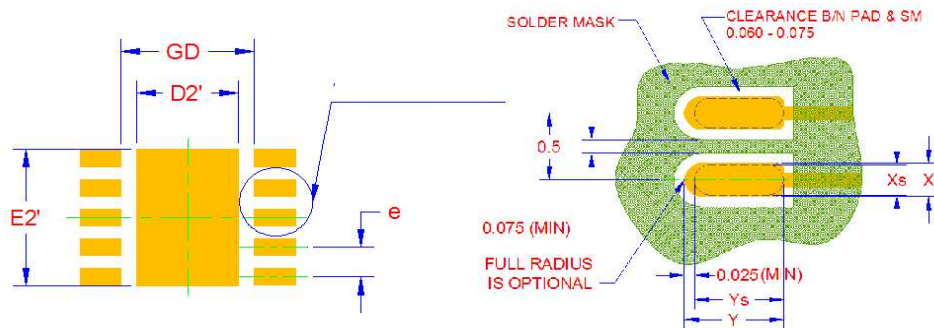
10-Pin DFN 3mm x 3mm Package Drawings
